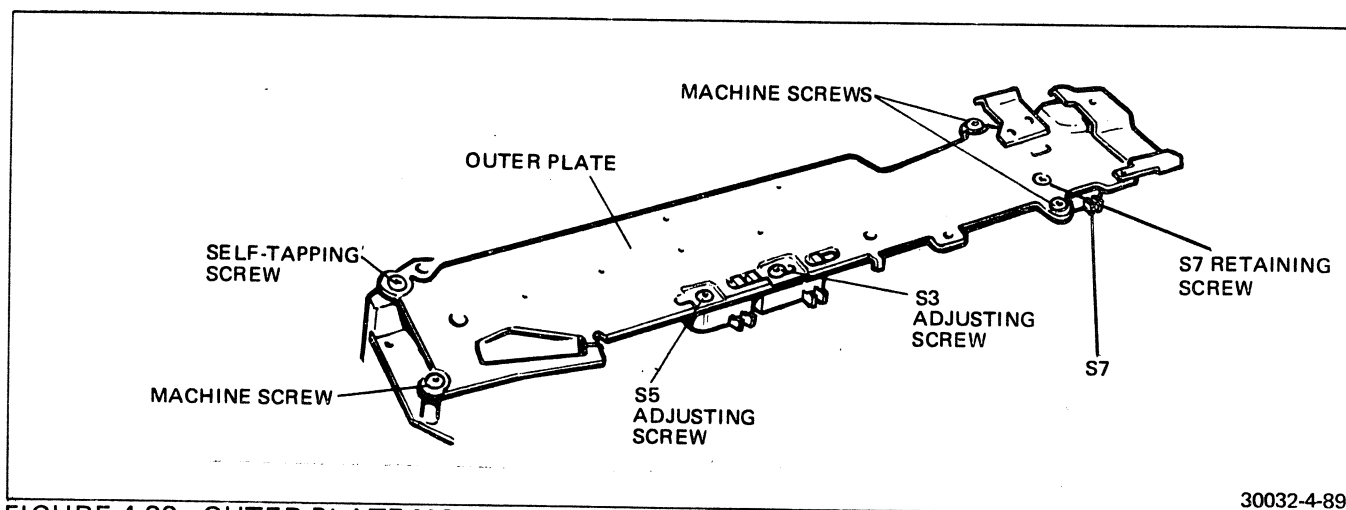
OUTER PLATE MOUNTING SCREWS
